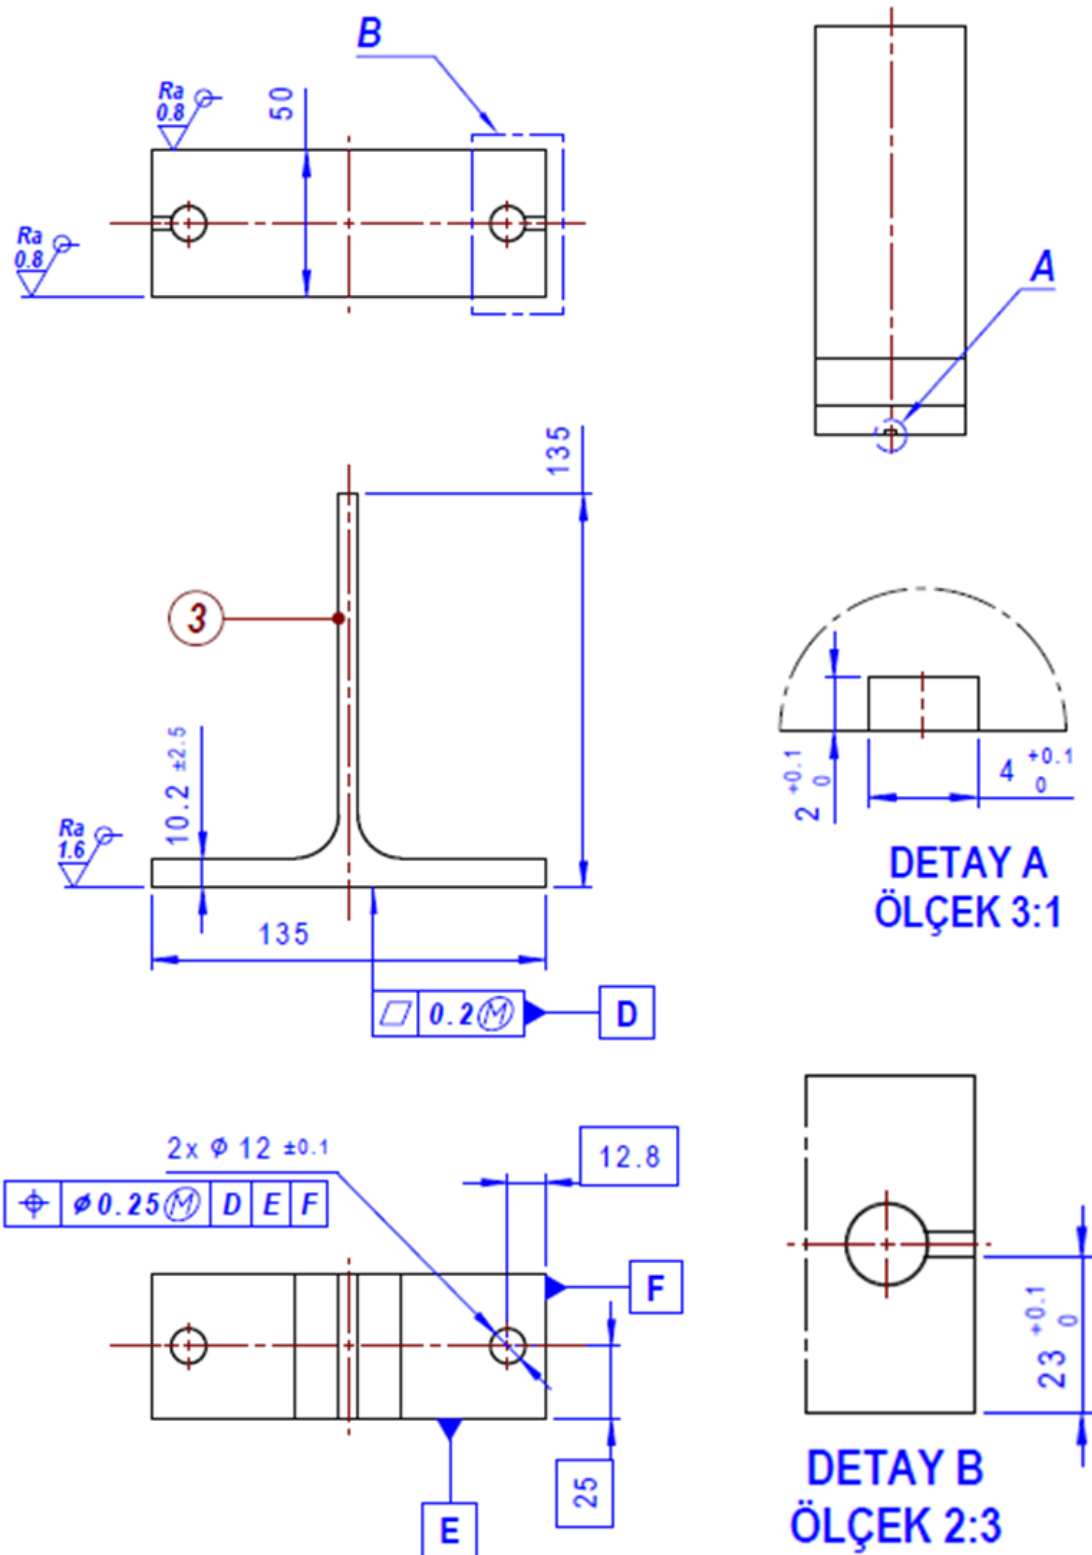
The technical drawing of the setup part with higher eccentricity.
